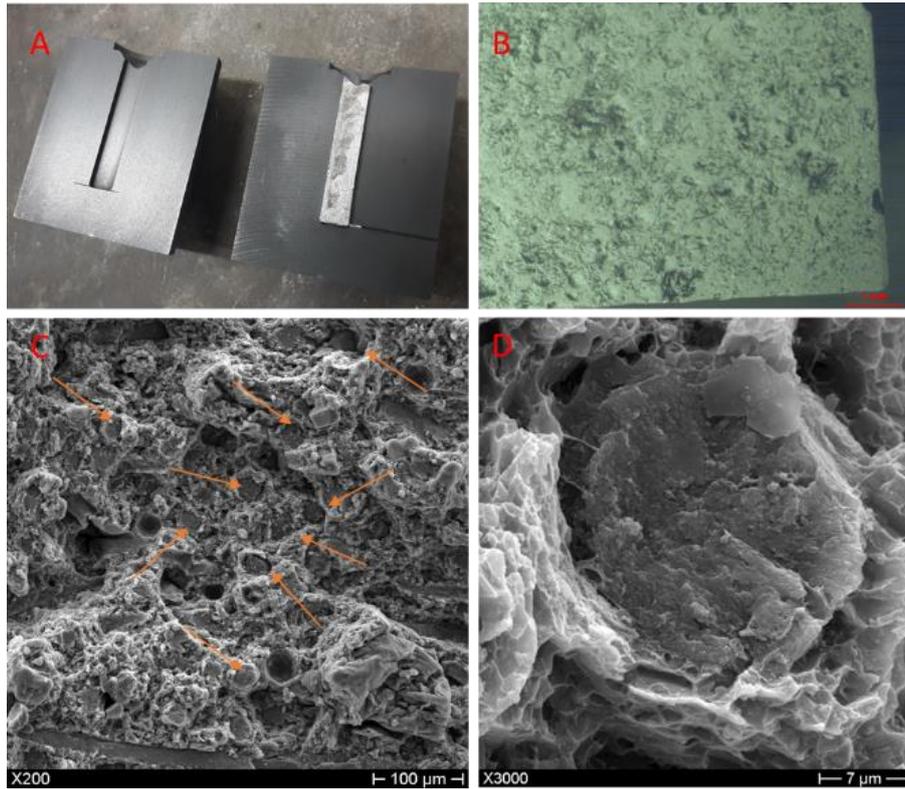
A) Sample after cast with short fillers; B) Cutting surface after acid treatment; C) Fracture surface of sample with short fillers; D) Enlargement on one single short basalt fibre.
